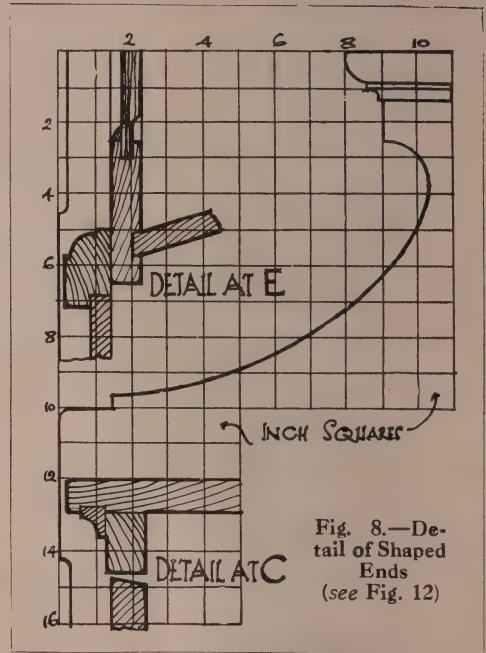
Detail of Shaped Ends (see Fig. 12)
